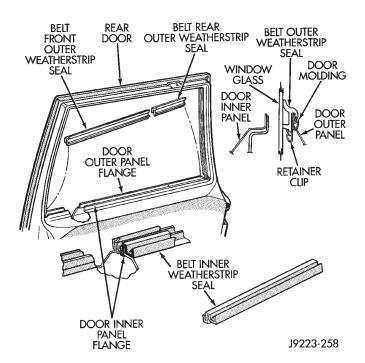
Rear Door Belt Outer and Inner Weatherstrip Seal
